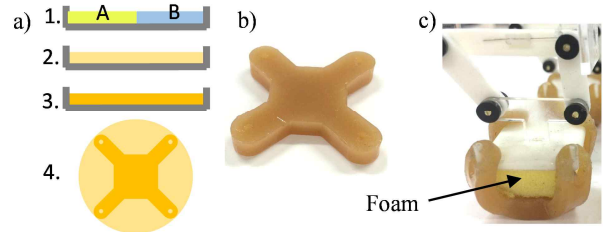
Fabrication process of V-10 footpads. a) Fabrication process and b) manufactured V-10 footpad. c) Assembled footpad.
